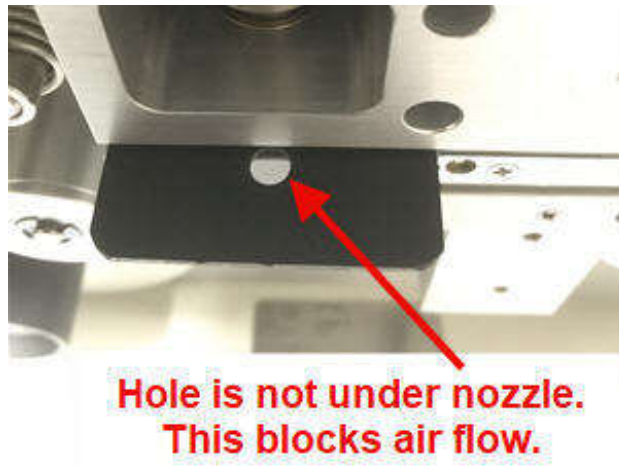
Nozzle Seal Tool with Solid Side Under the Nozzle
